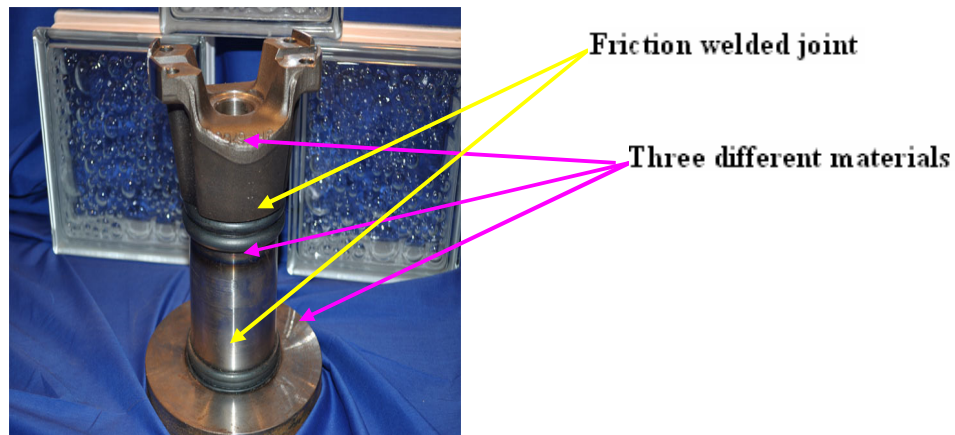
Three different materials joined by friction welding ^[8]
